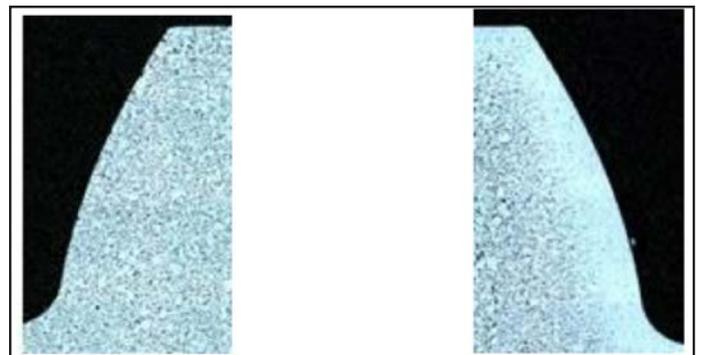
PM gear flanks, cut view, left: non-densified flank; right: densified flank with pore removal.
